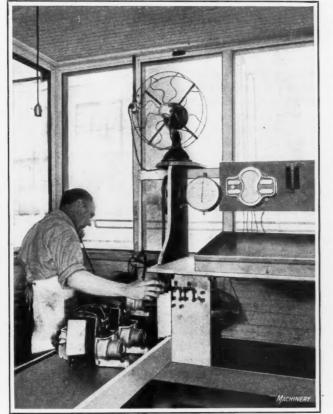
Inside of a Soundproof Inspection Booth, where Apparatus is inspected for Silent Running
